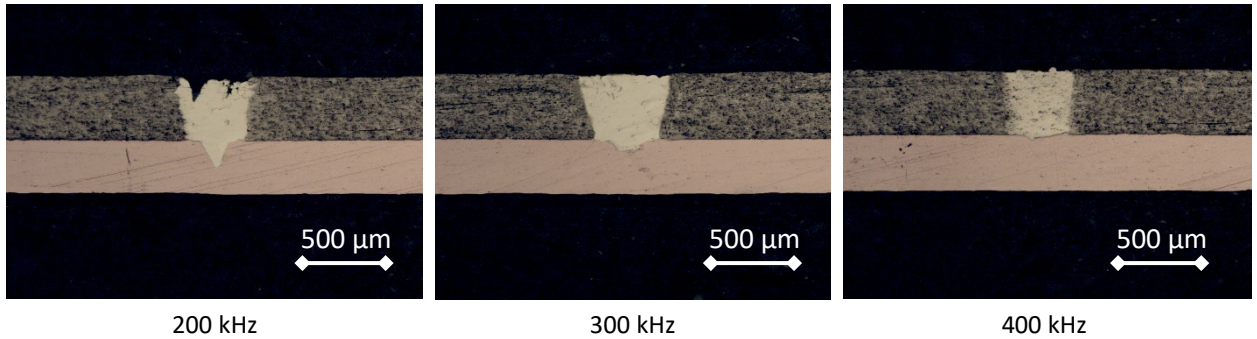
Examples of weld beads (SPI G4 EP-Z 100W)
